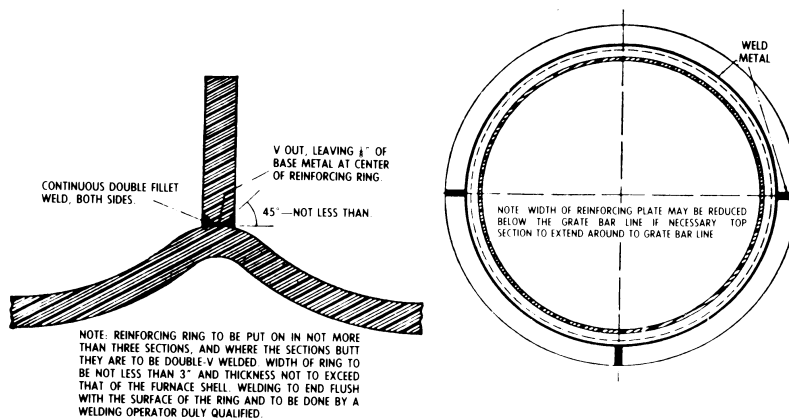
APPROVED METHOD OF REINFORCING FURNACES BY MEANS OF ARC OR GAS WELDING
